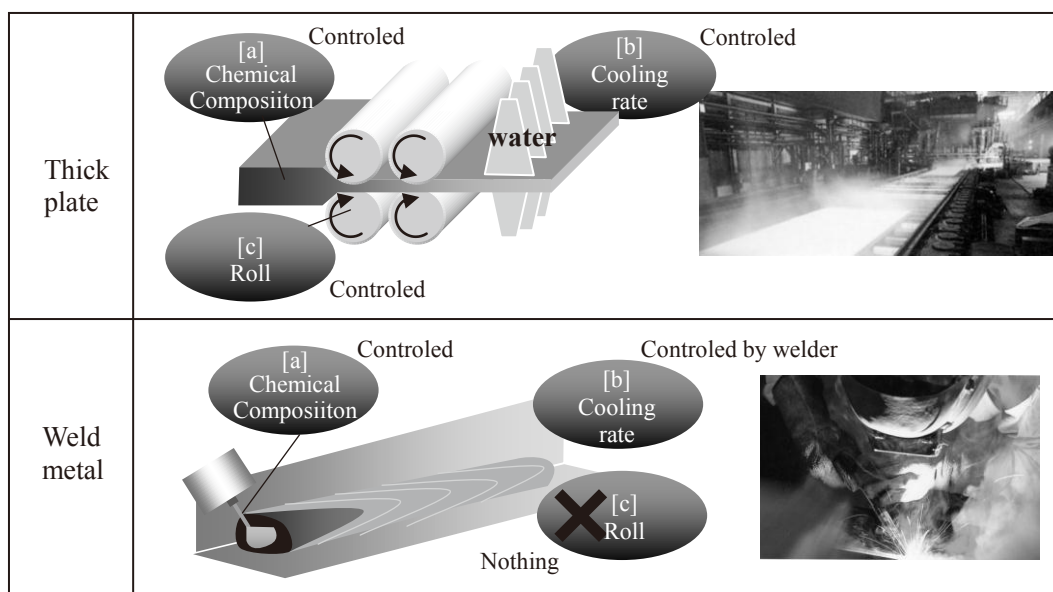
Difference of mechanical properties control method between thick plate and weld metal⁴⁹⁻¹⁾
